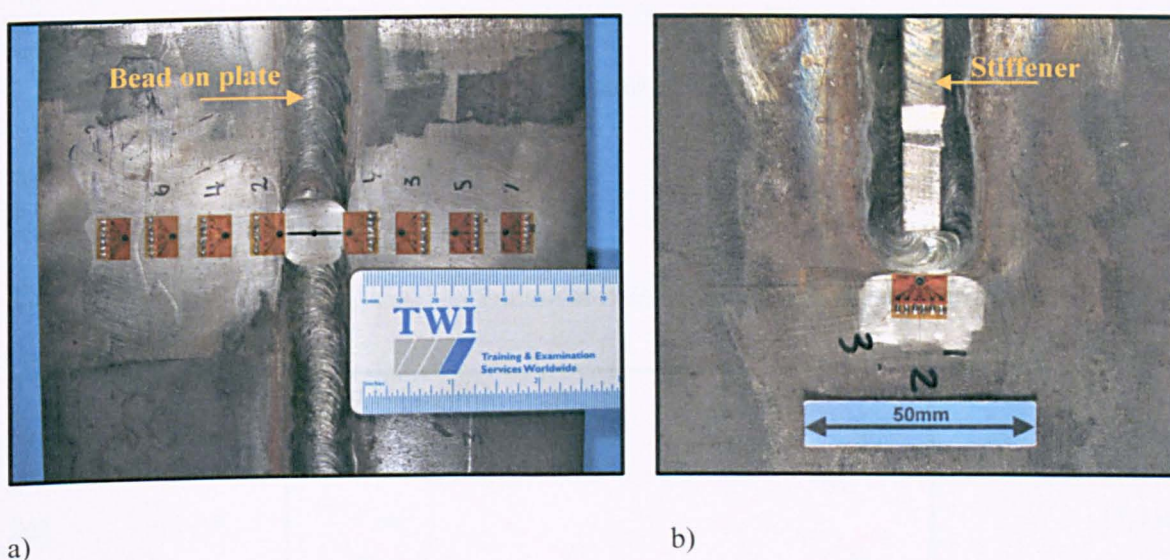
CCT (a) and Fillet welded (b) specimens showing trepanned holes after residual stress measurement.
